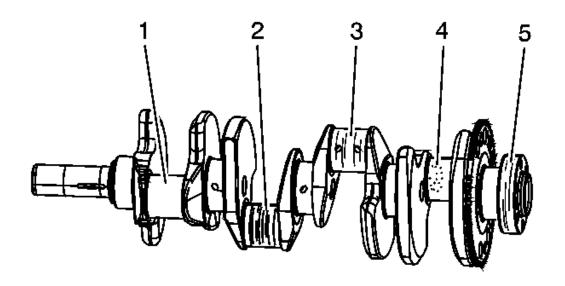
View Of Crankshaft Journals Courtesy of GENERAL MOTORS CORP.
